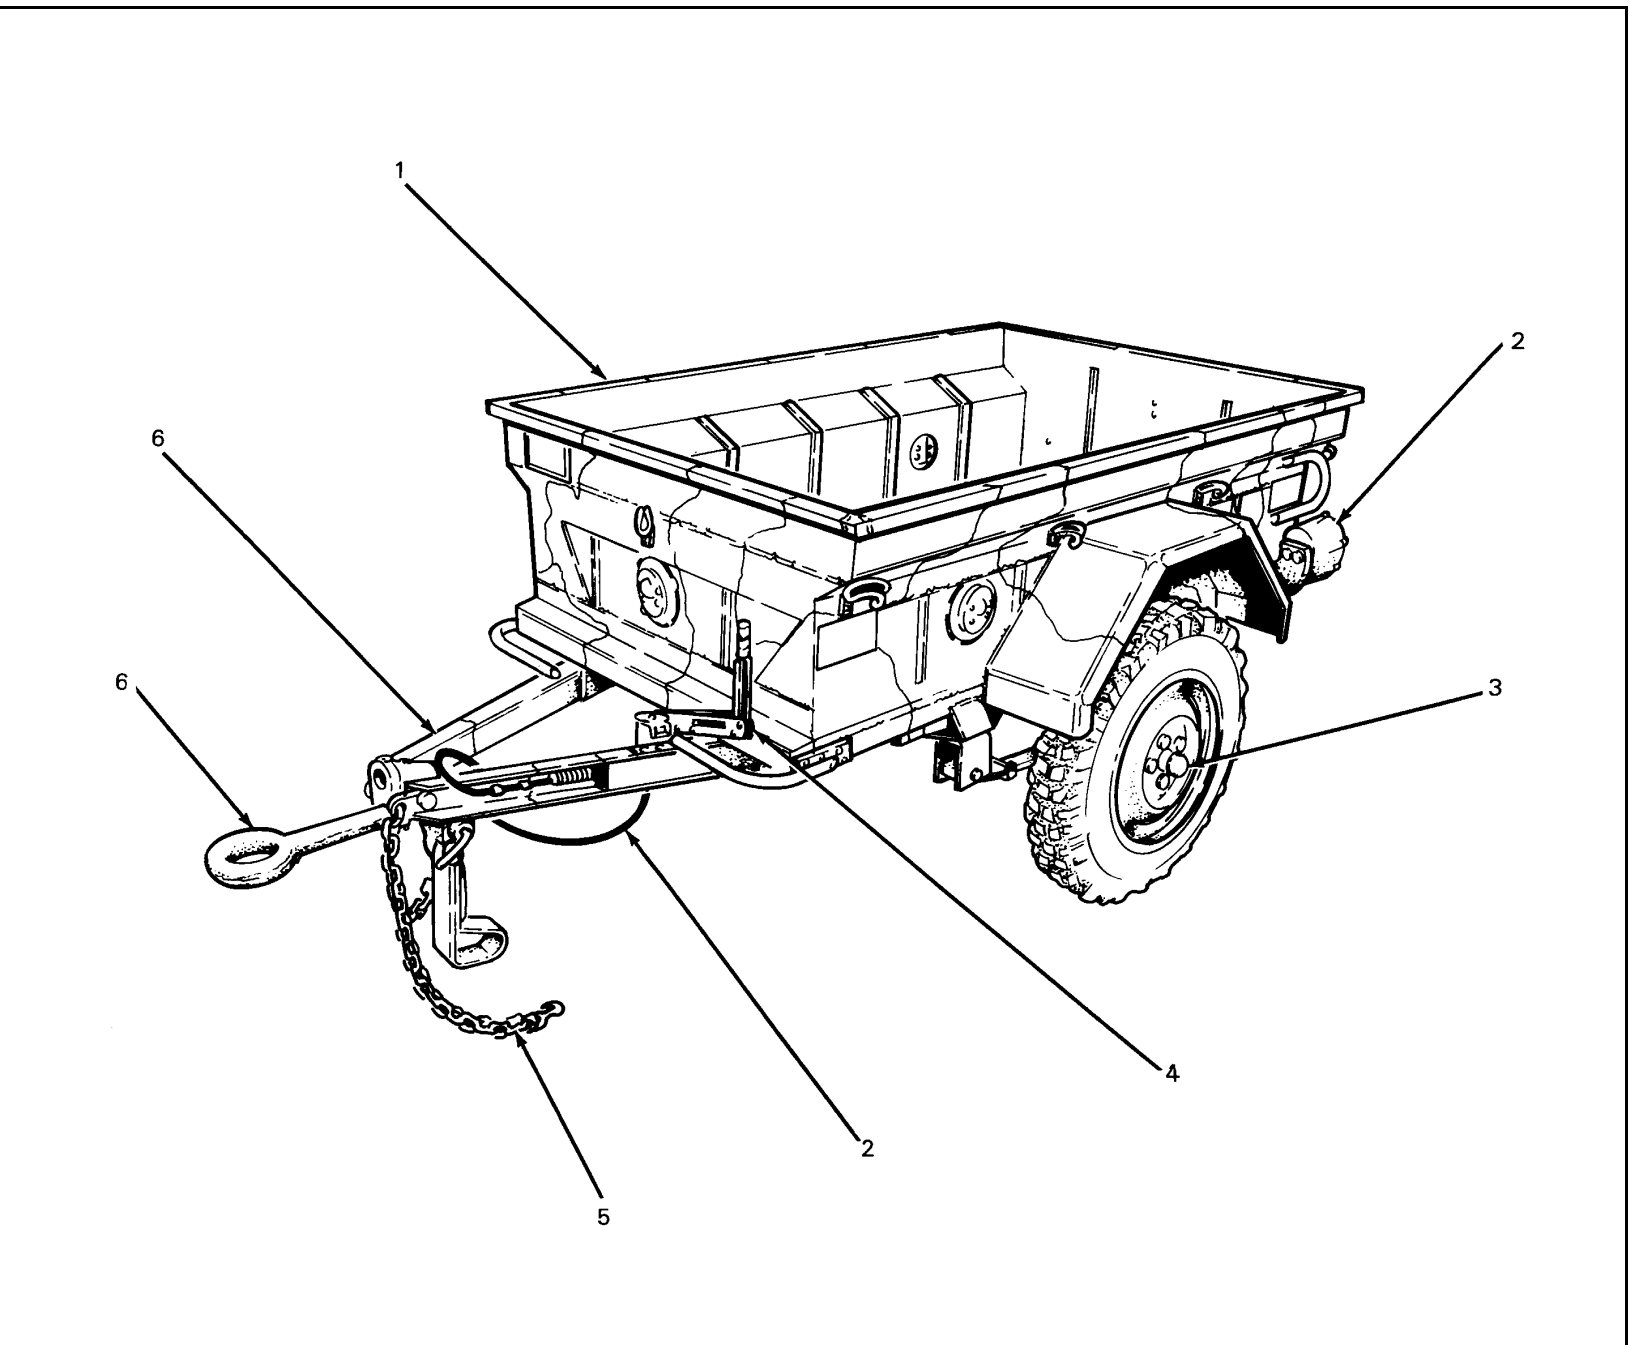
1/4 Ton Trailer Major Assemblies
